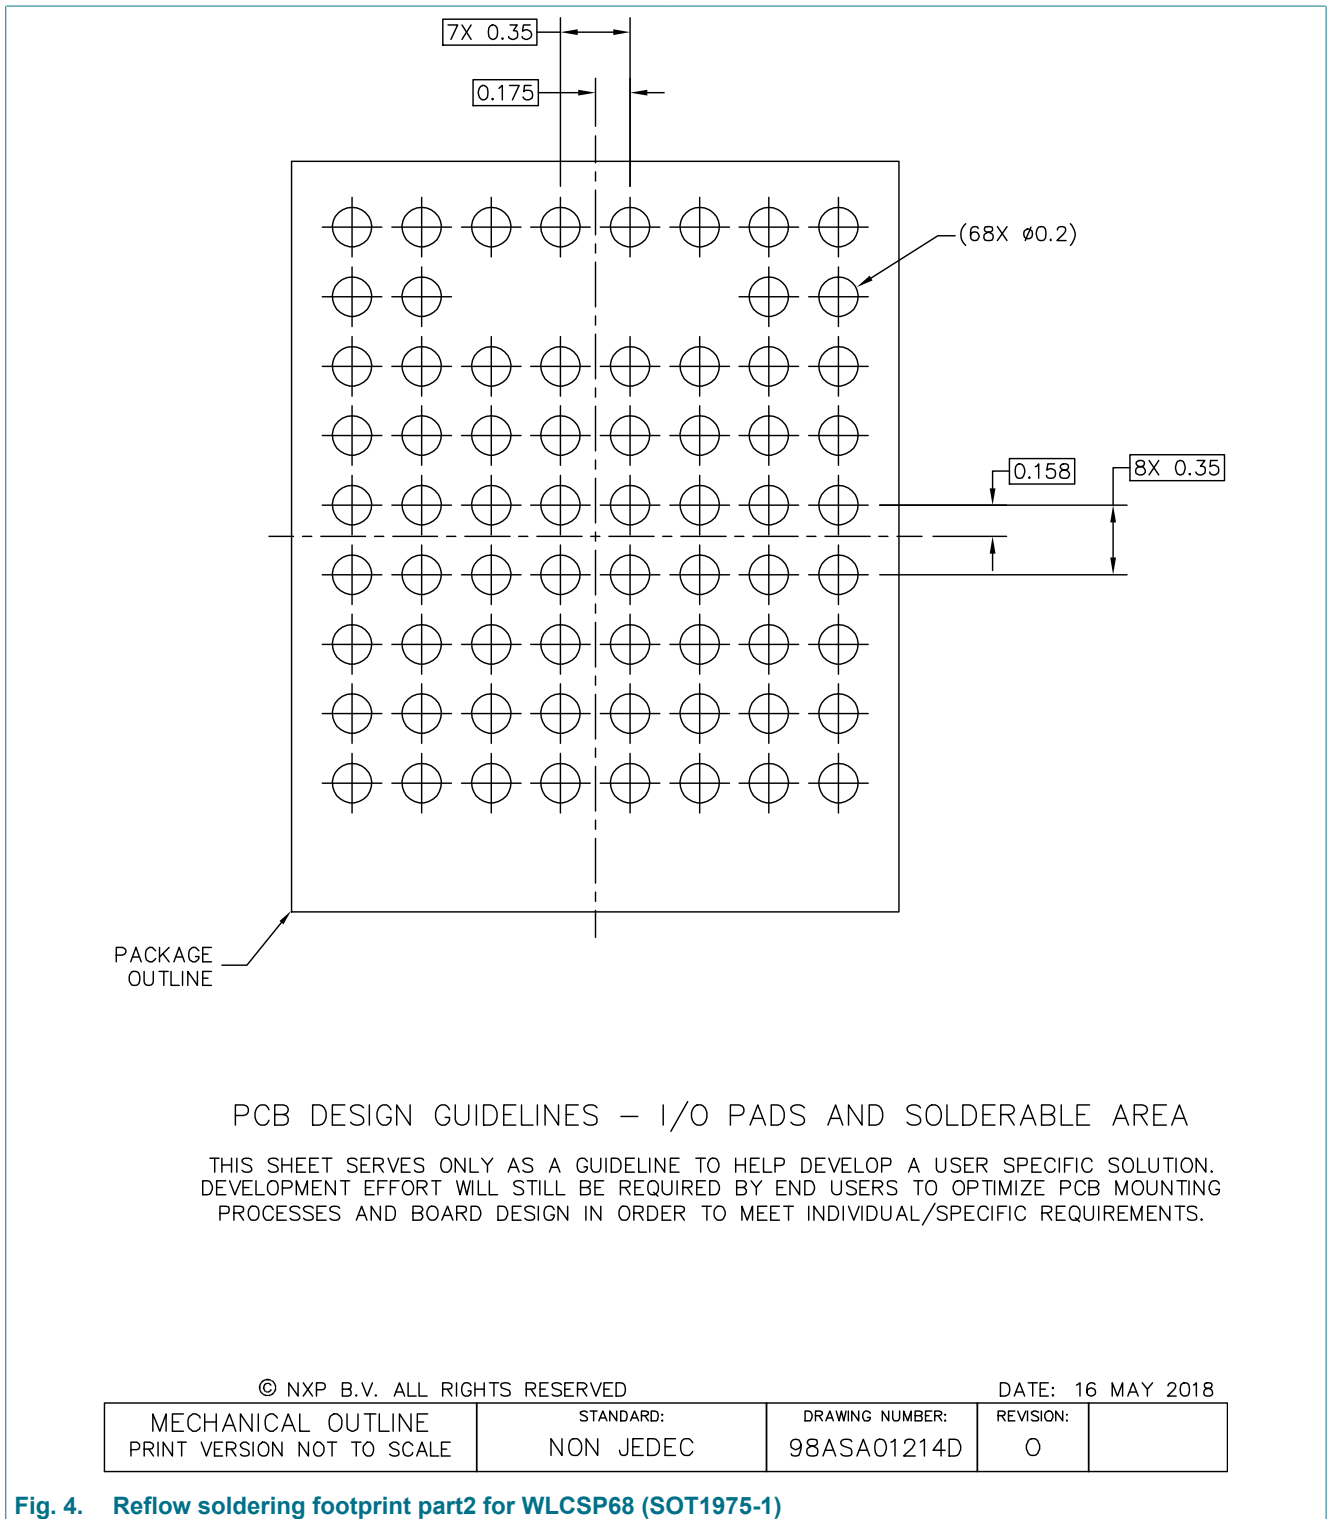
Reflow soldering footprint part2 for WLCSP68 (SOT1975-1)
